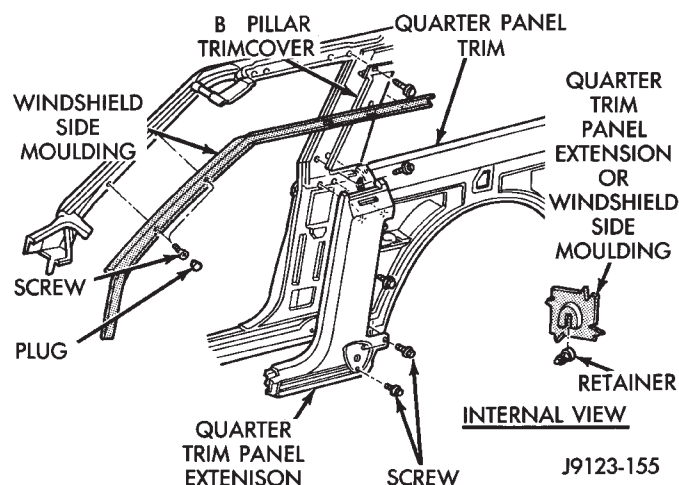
Windshield Side Molding, Quarter Trim and Extension Panels
